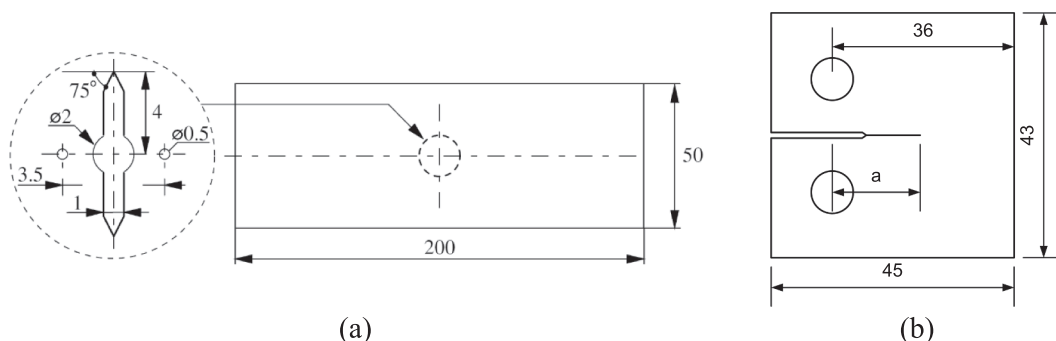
Geometry and main dimensions [mm] of the: (a) MT specimen; (b) CT specimen.
